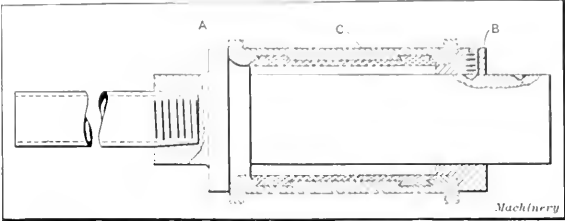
Adjustable Mandrel for babbitting Plain Half Bearings
